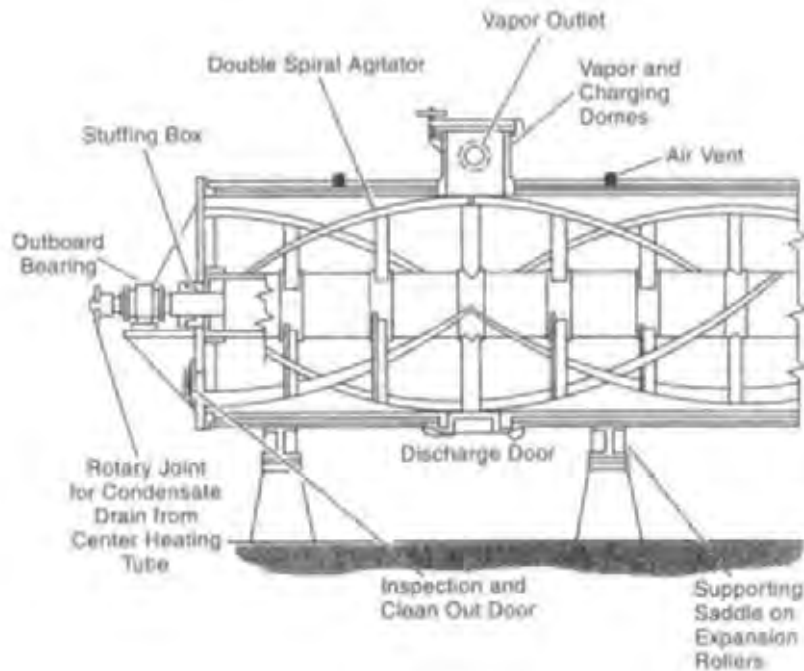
C12-3 A typical vacuum rotary dryer. (Courtesy Buffalo Technologies Corp.)
